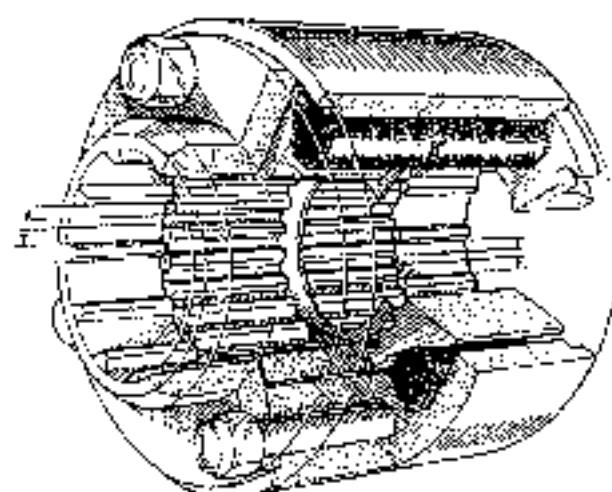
Diagram of flexible coupling for clutch-gearbox shafts.
